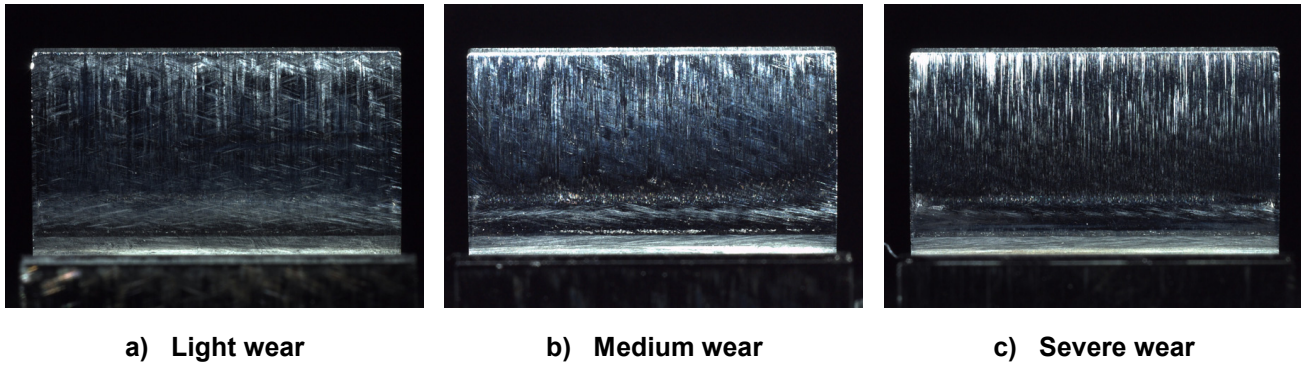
FZG A-type gear tooth flank changes due to continuous wear
